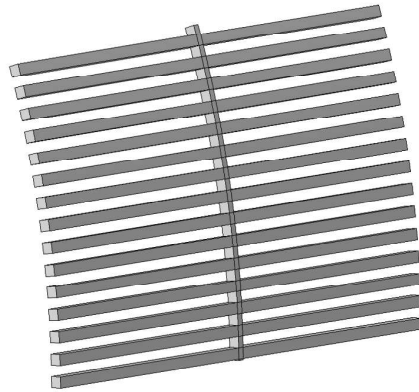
Geometry of the mechanical model with ribbed pole-pieces
